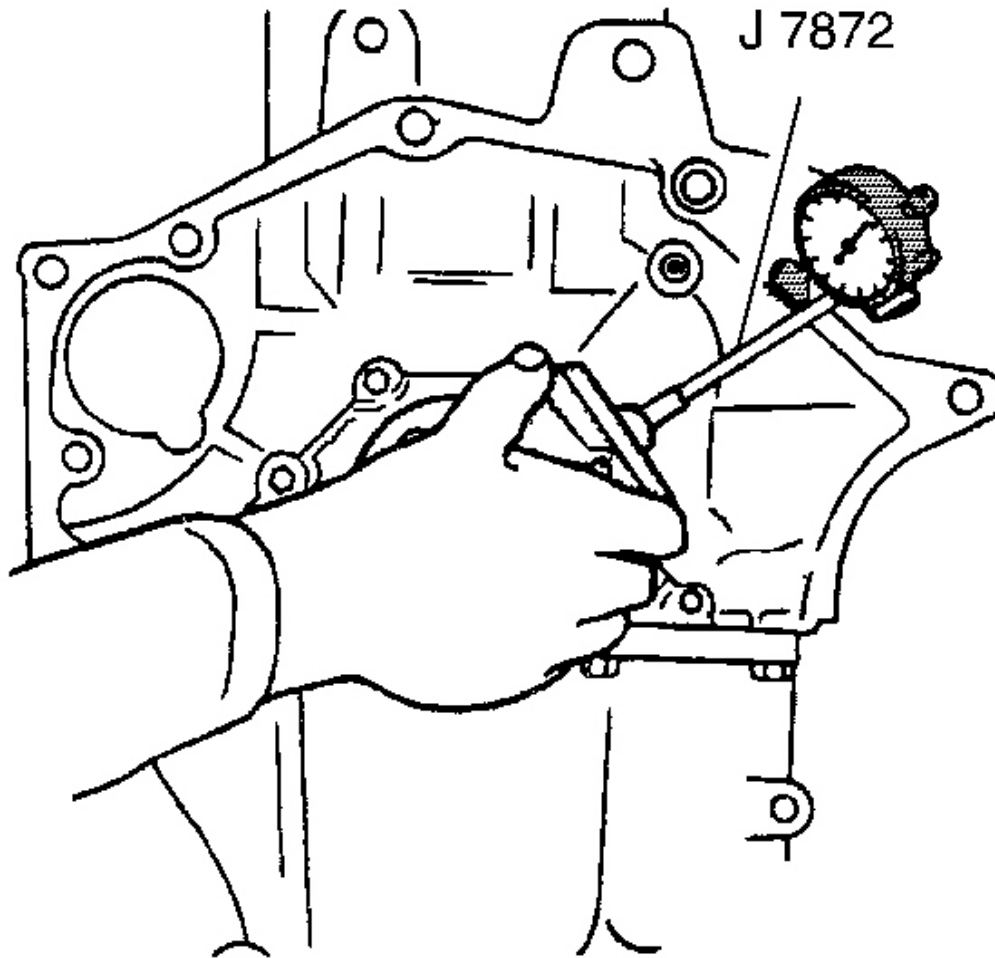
Measuring The Engine Block Flange Runout At The Mounting Bolt Hole Bosses
